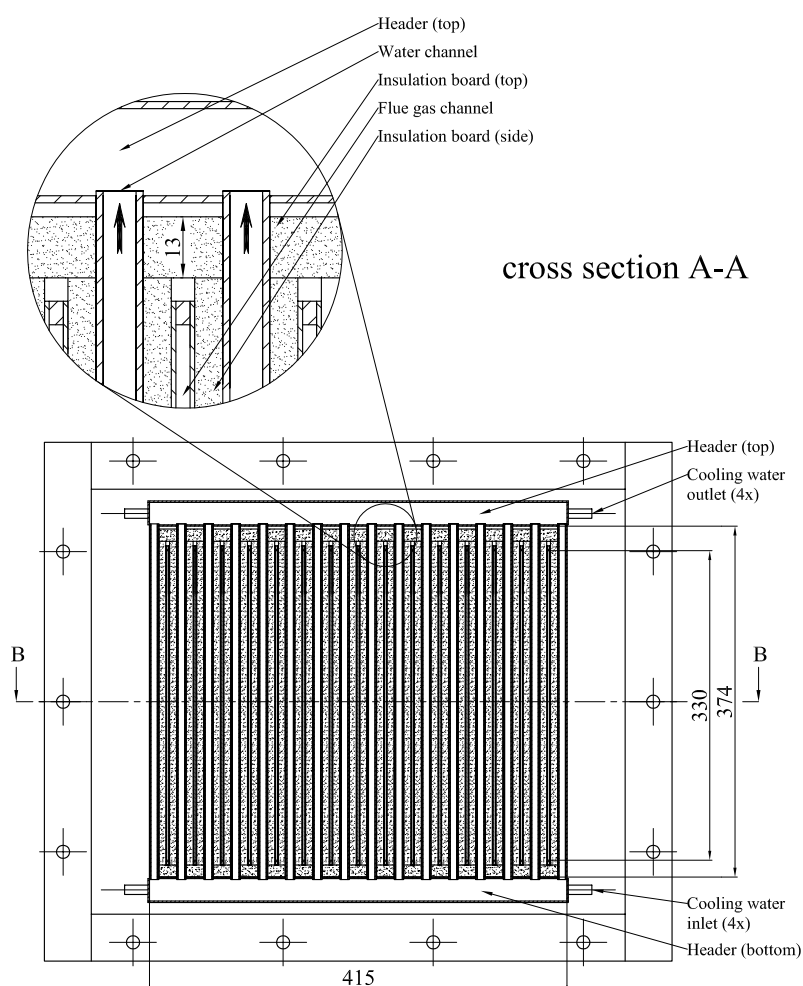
Cross sectional front view of the insulated plate type heat exchanger
